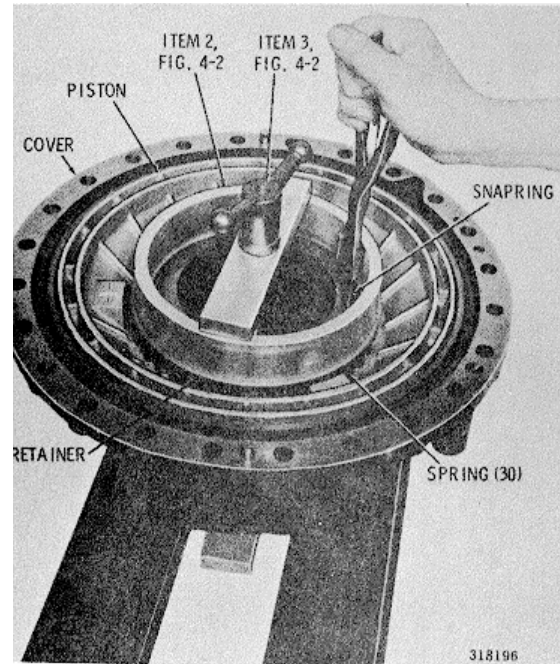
Removing (or installing) snap ring that retains piston in rear cover
